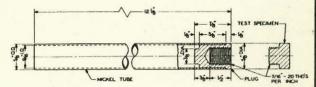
ASSEMBLY OF CAVITATION-TUBE PLUG AND TEST SPECIMEN
